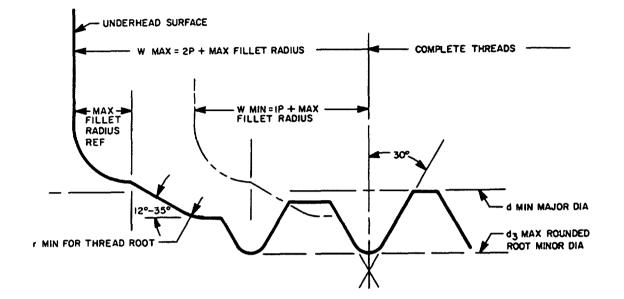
FULL SHANK FASTENER - THREADED TO HEAD
